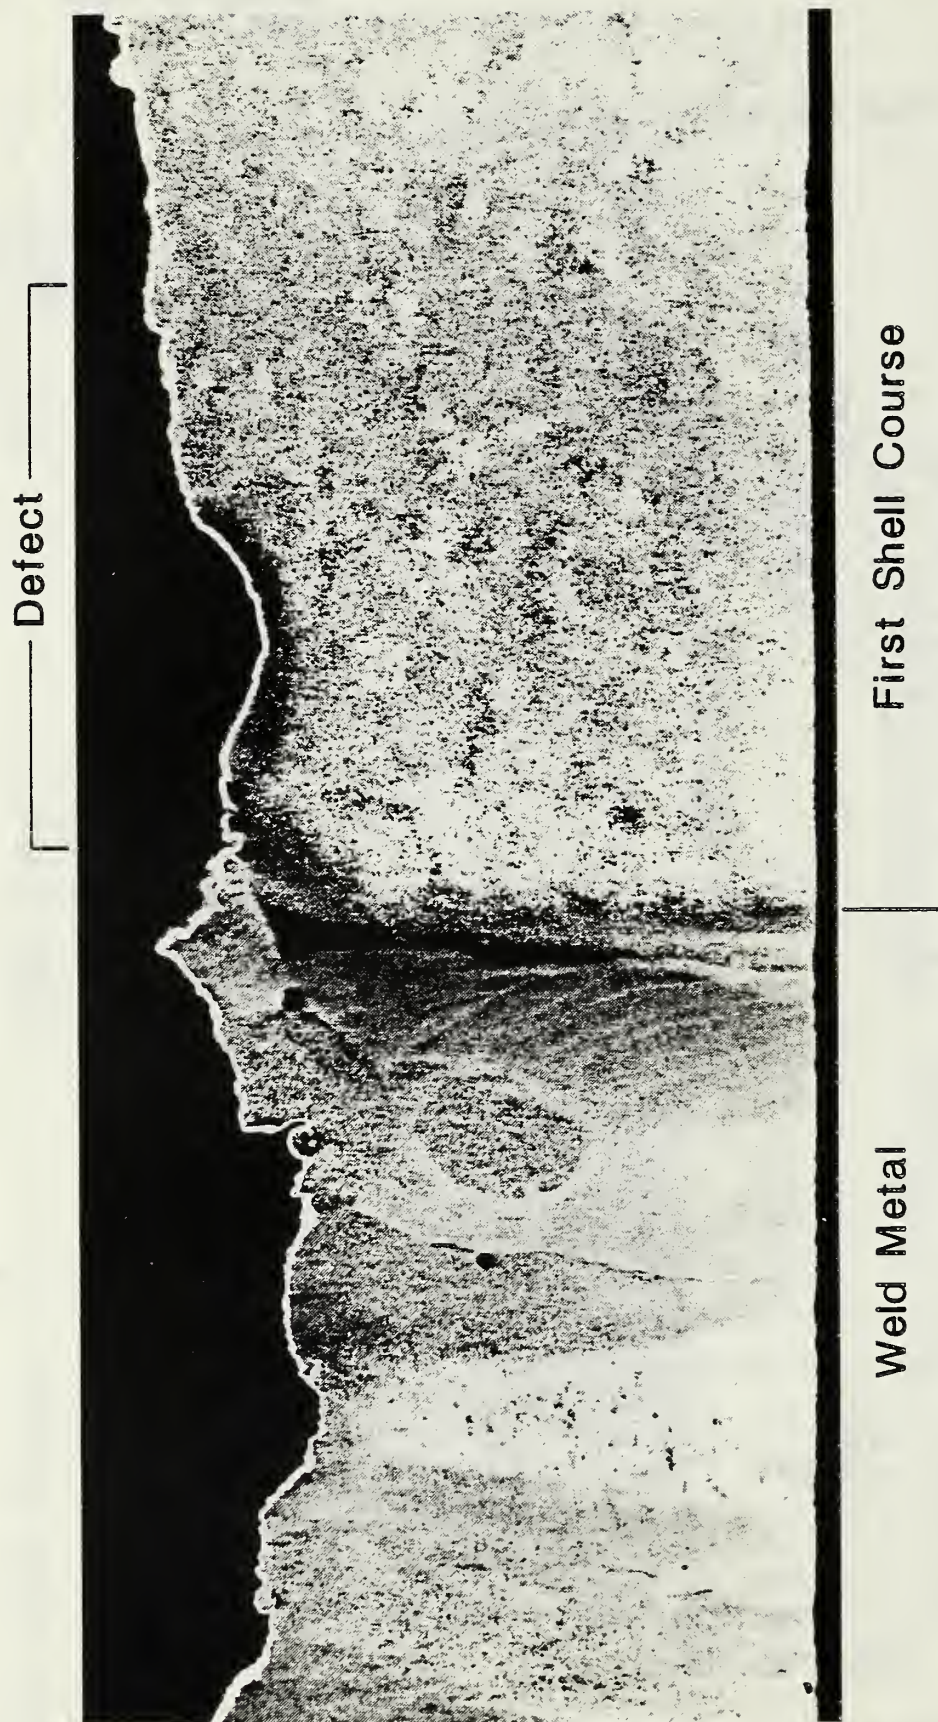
Transverse Section of Fracture Surface Defect Showing Exact Location of Defect
